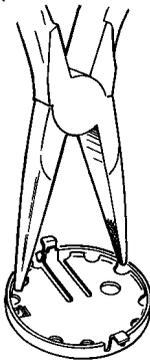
Removal of Card Support from W.E.Co. Card Holder Frame.
